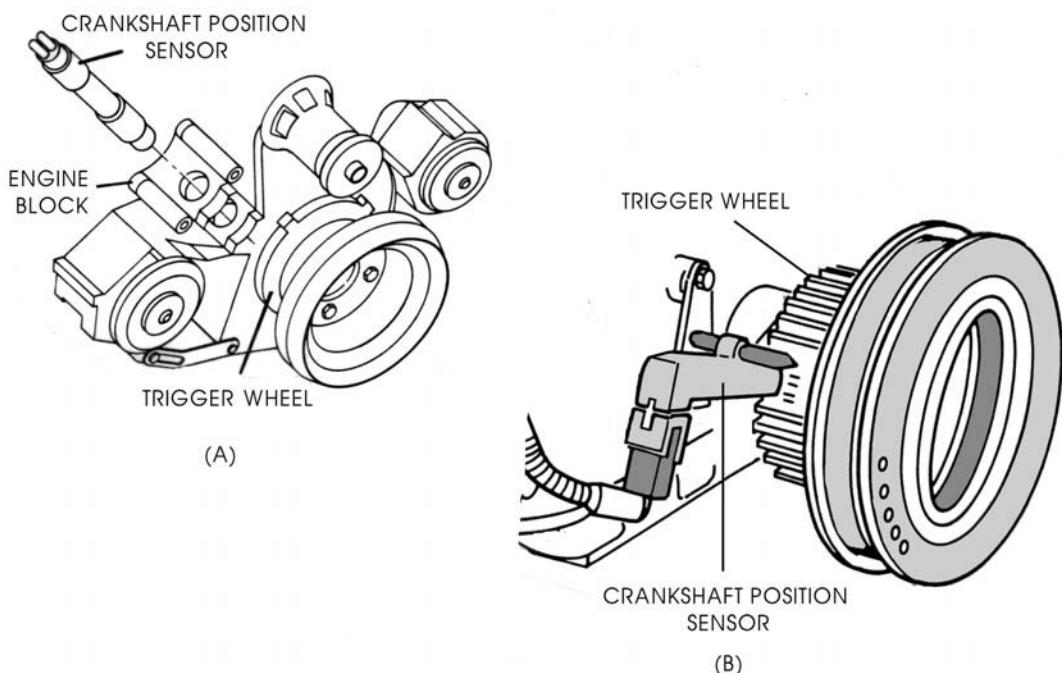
In most cases, the crankshaft position sensor fits into a machined hole in the engine block next to the trigger wheel, as shown in Figure 50A. In Figure 50B, the crankshaft position sensor is mounted to the engine's front cover, and the trigger wheel is mounted at the front of the crankshaft.
